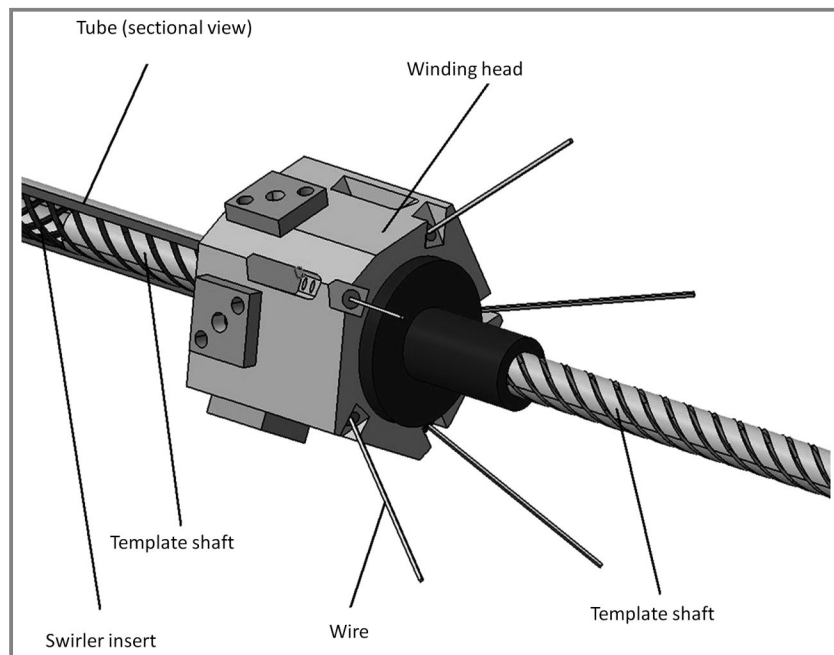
Template shaft, winding head, tube and swirler insert on turning back (5-wire inserts).
